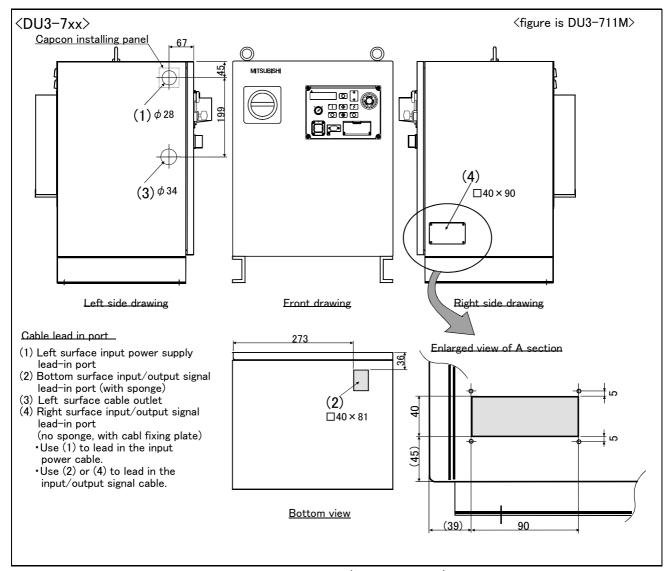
Cable lead-in and dimension of the controller (DU3-7xx Series)
